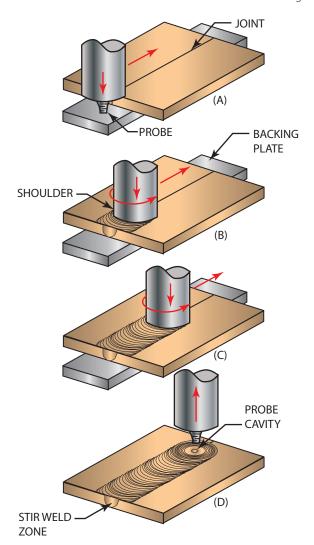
Sequence of a friction stir weld.
